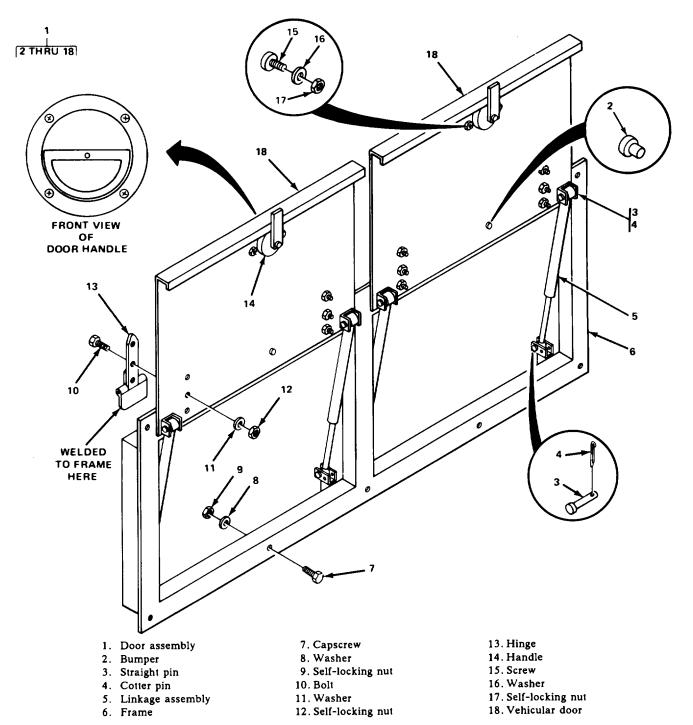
Hose Reel Cabinet Door Assembly (M969 and M969A1).
